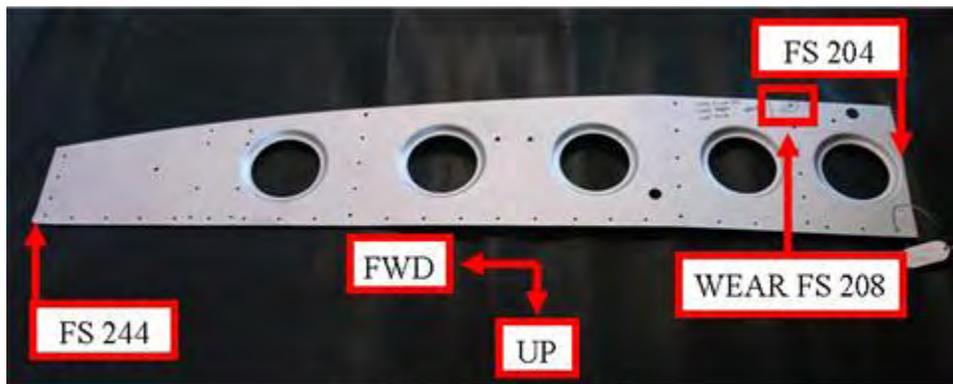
Macroscopic View of Wear on the Left Longitudinal Beam Assembly FS 208
